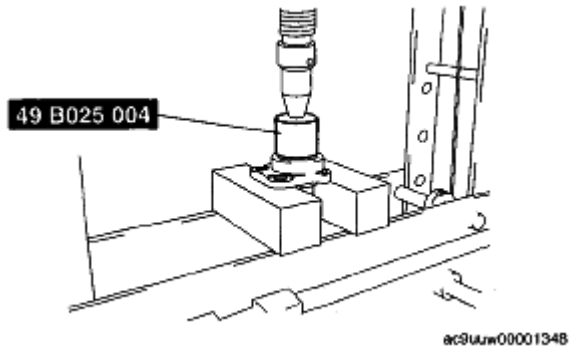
Pressing Dust Seal (Axle Side) With SST
